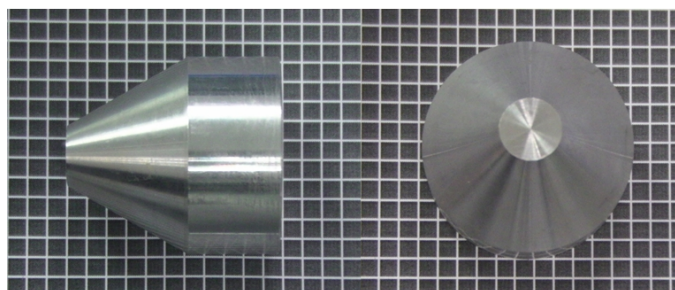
Images of shaft for expansion of star-shaped sample (side view and top view).
